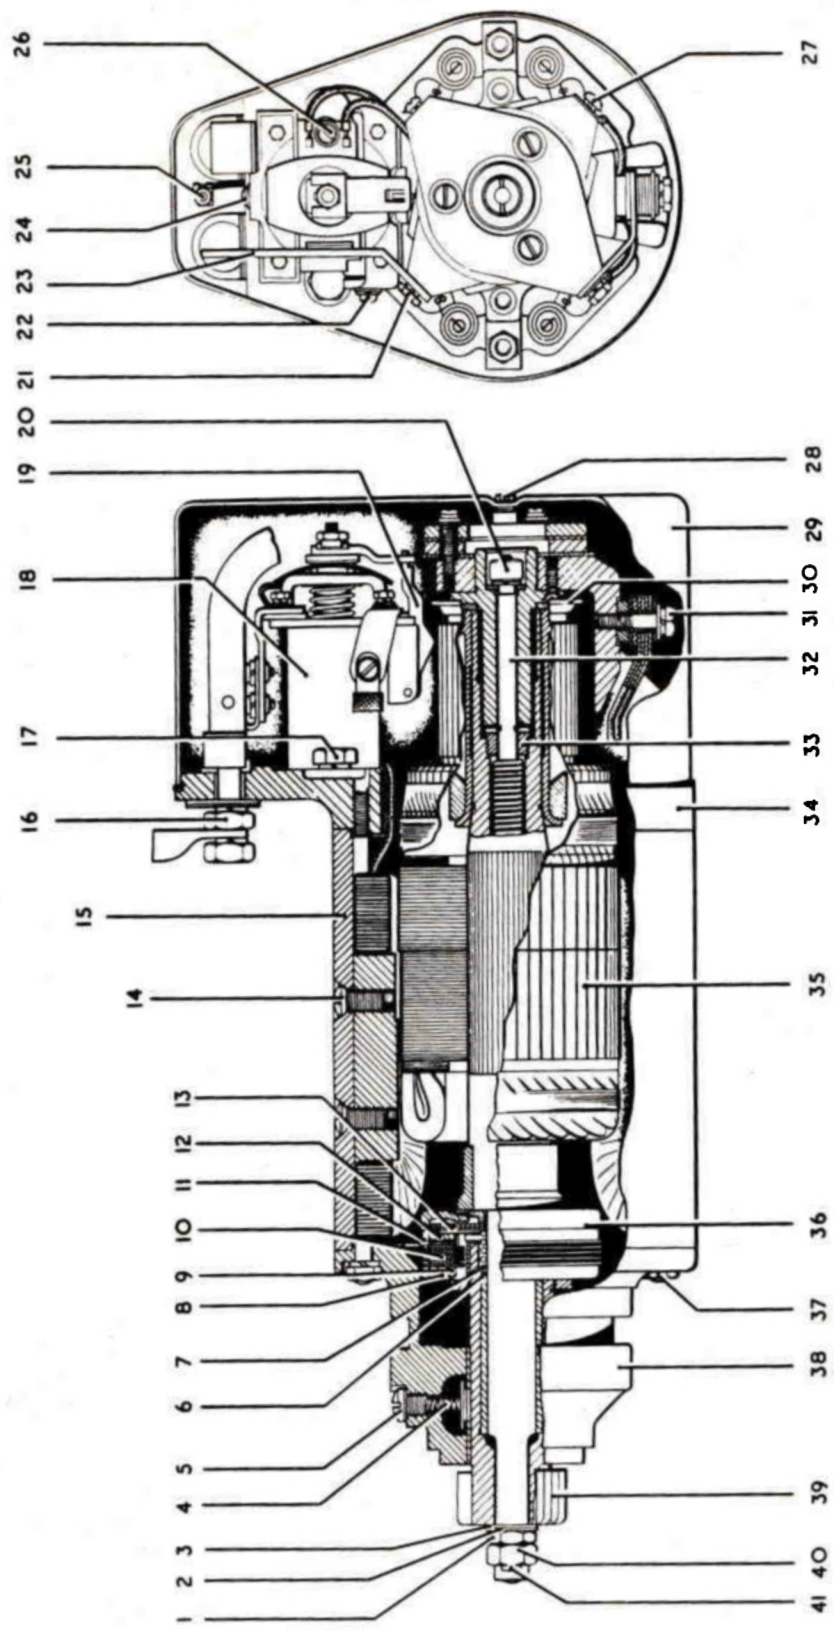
Sectioned view of typical 'Axial' starter with 'cast' brush gear
